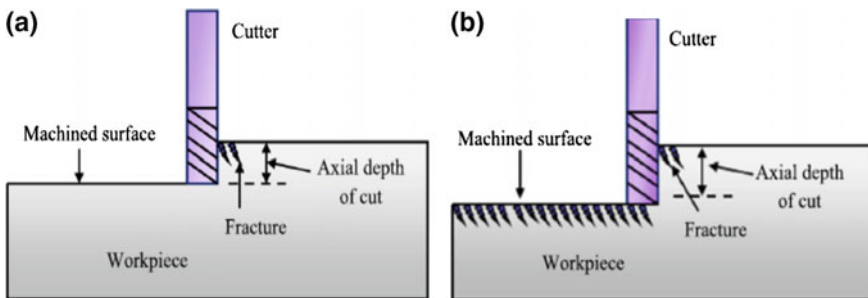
a Low feed per edge ductile mode milling process; b High feed per edge brittle mode milling process [54]
